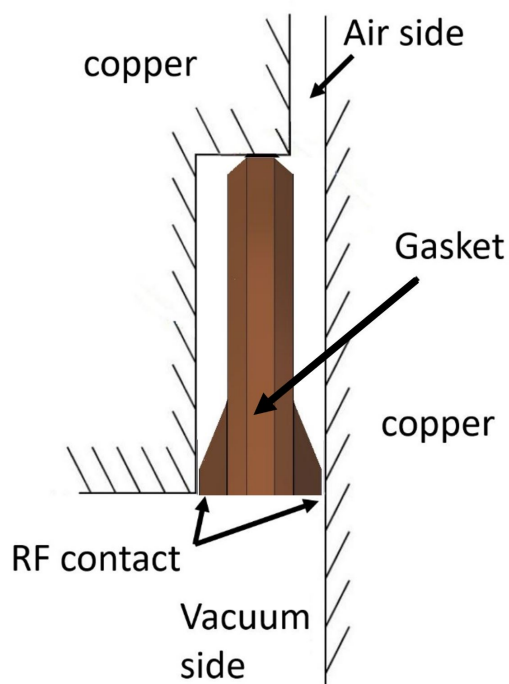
Sketch of the transverse profile of the special vacuum/rf gasket used for gasket clamping technique.
